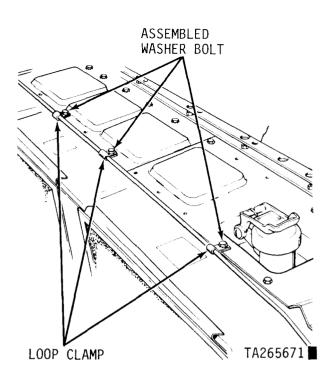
Removing or installing smoke generating system fuel tube loop clamps.
